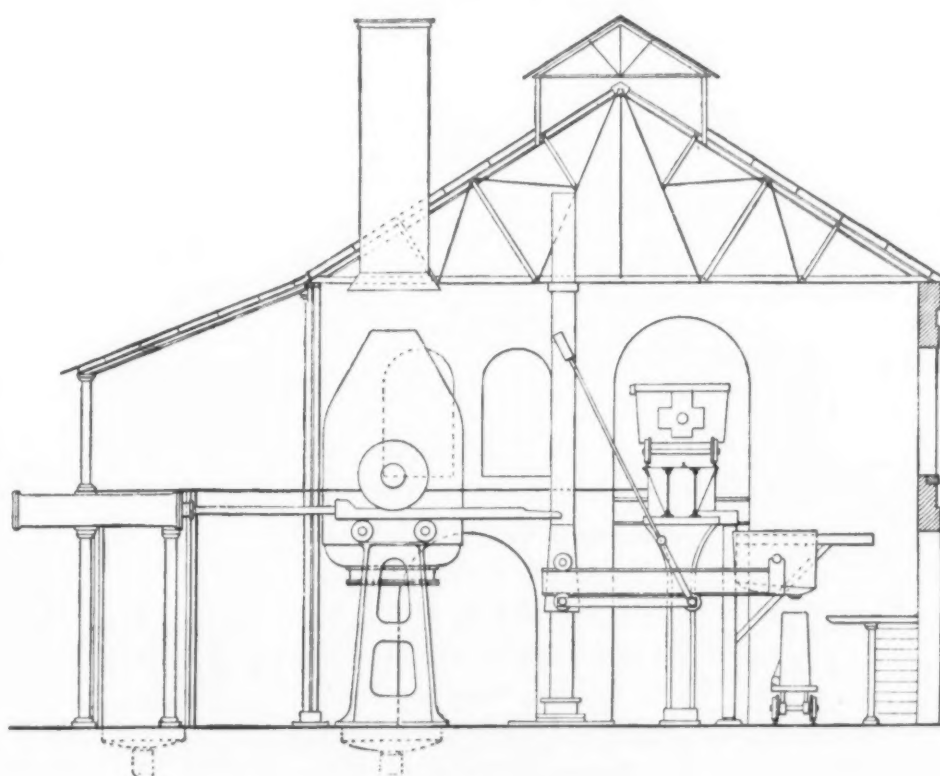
Cross-Section of Laureau Bessemer Plant.
